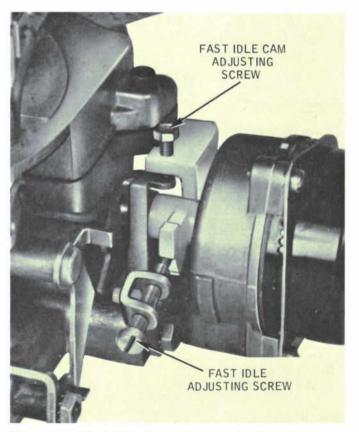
Fast Idle Cam Position for Engine Warm - Up
